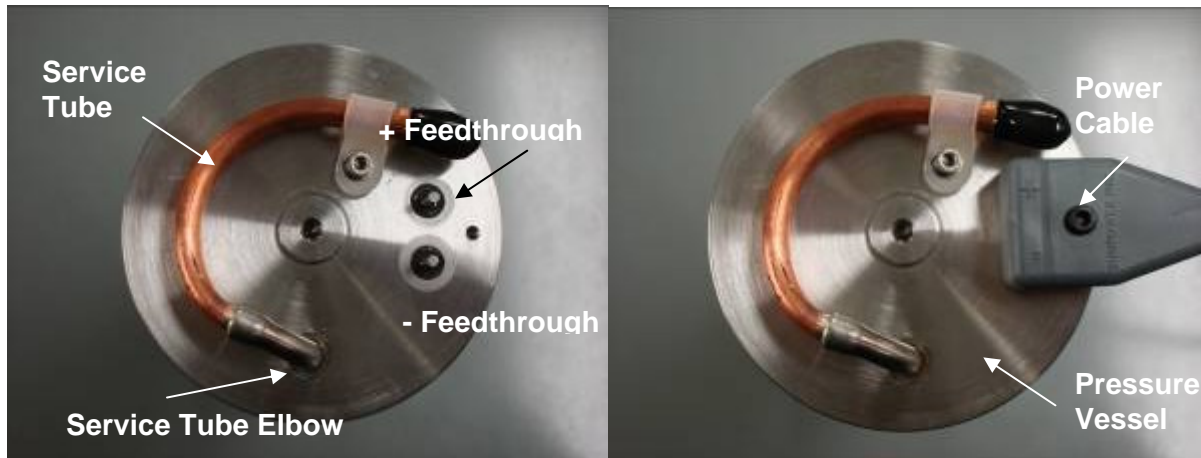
Rear Pressure Vessel End Plate and Power Cable Wire Harness
